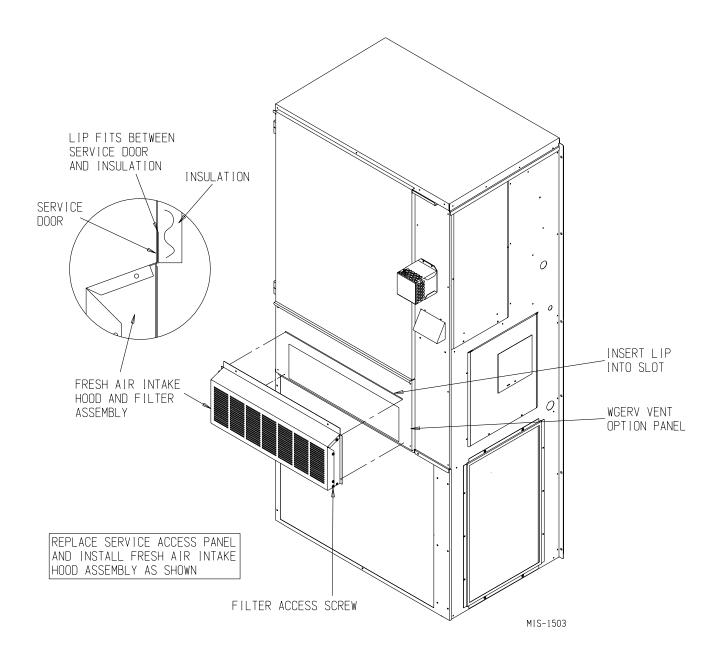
INSTALLATION OF FRESH AIR INTAKE HOOD ASSEMBLY
